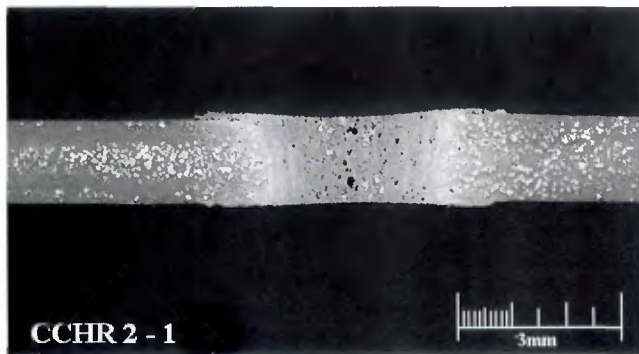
Cross section of a conductive heat seam weld made on 1.5-mm Thixomolded AZ91.
